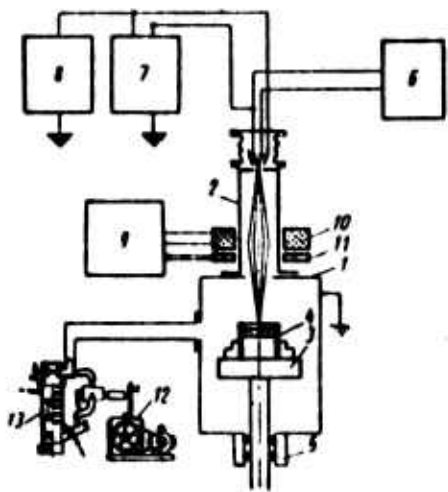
Schematic diagram of unit for electron beam welding.
